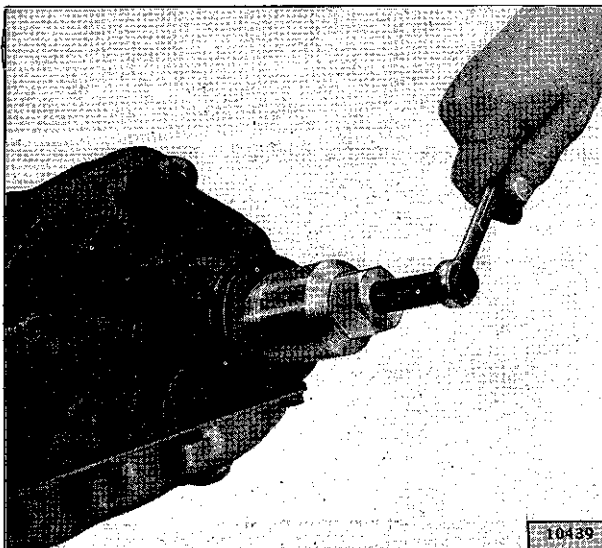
OUTPUT SHAFT OIL SEAL PULLER
